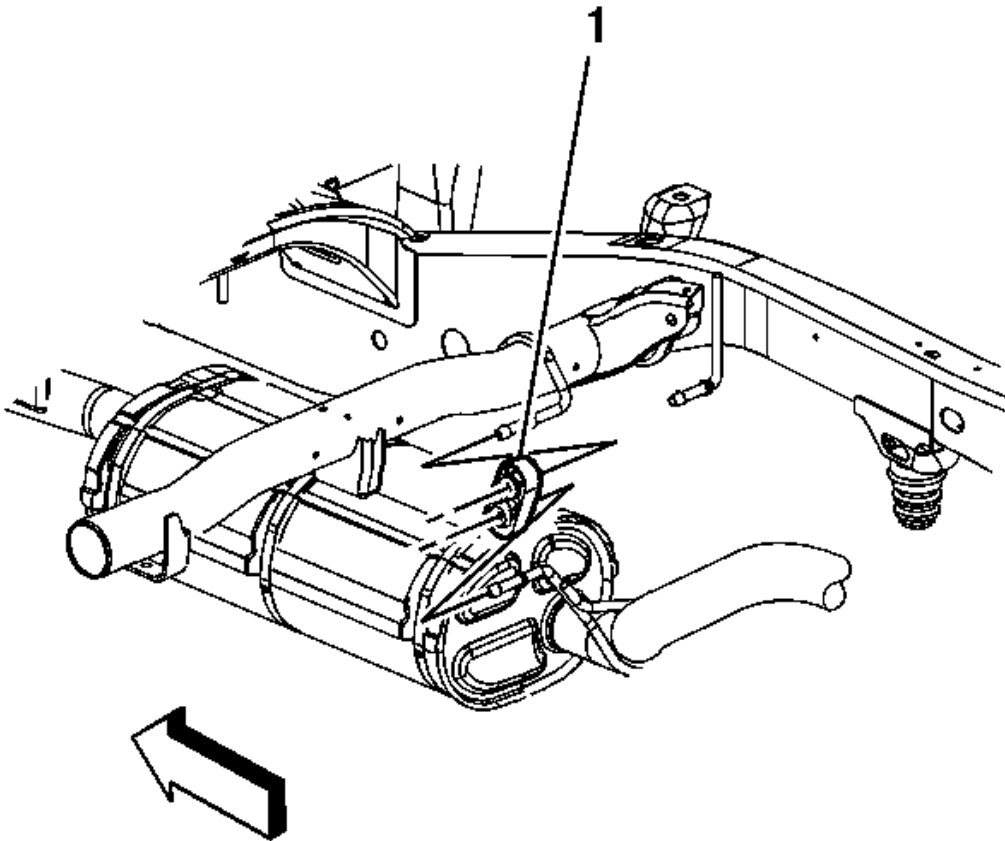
View Of Intermediate Muffler Assembly Insulator
